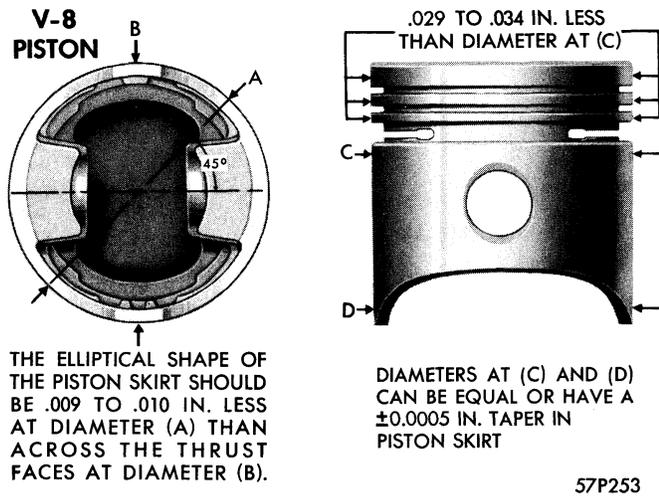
Piston—V-8 Engine—277, 301 and 318 Cubic Inch Engine
